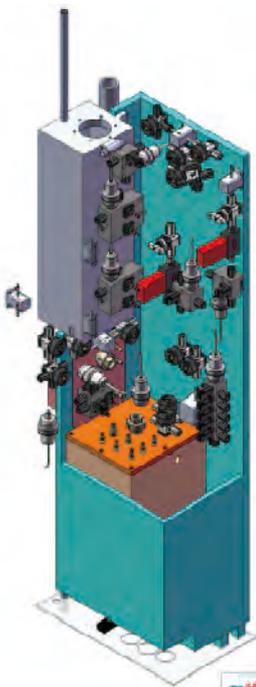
3D drawings of an example of on-board surface treatment equipment
